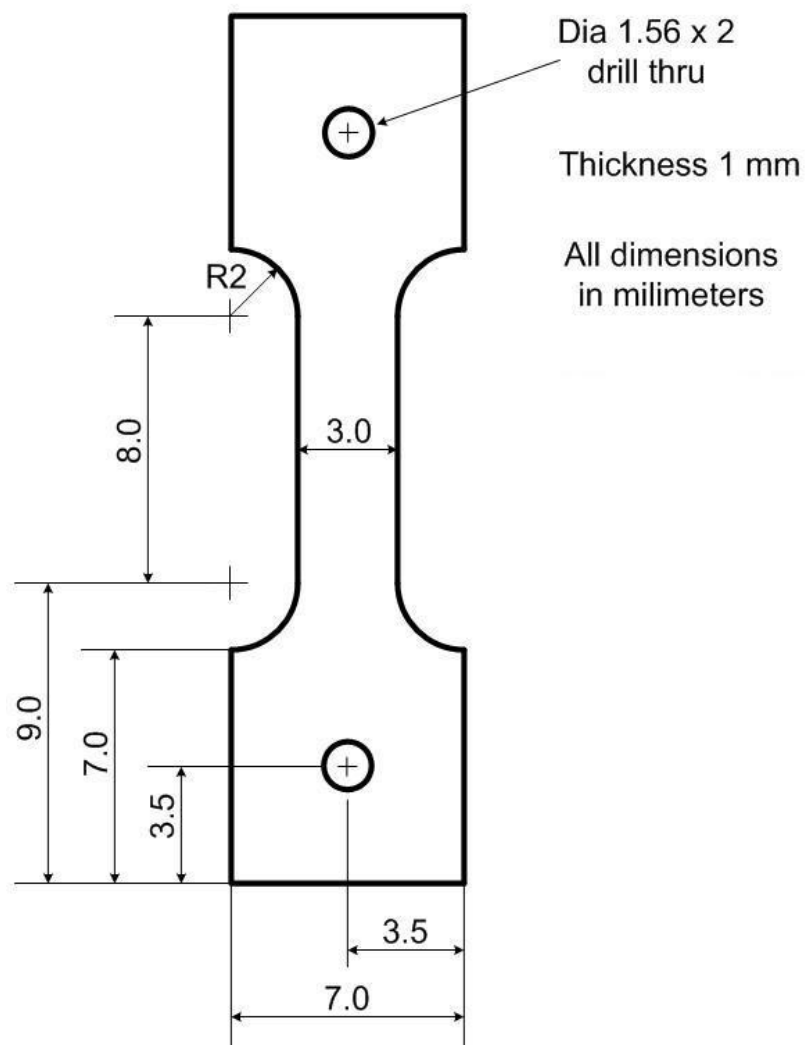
Specimen dimensions used for the tensile tests. This geometry follows ASTM E-8-04, for sheet type specimens.
